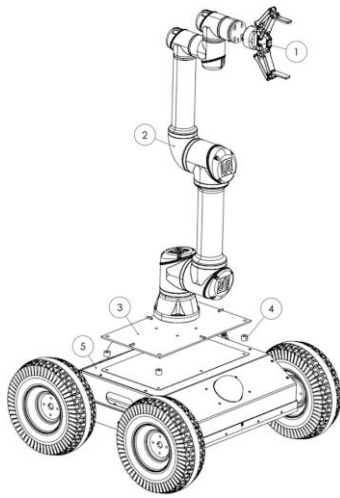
The designed CPS of the AMMR composed by 1) the gripper, 2) Cobot Universal Robots UR5e.; 3) Mounting platform; 4) load sensors; 5) the 4- wheeled robot.
